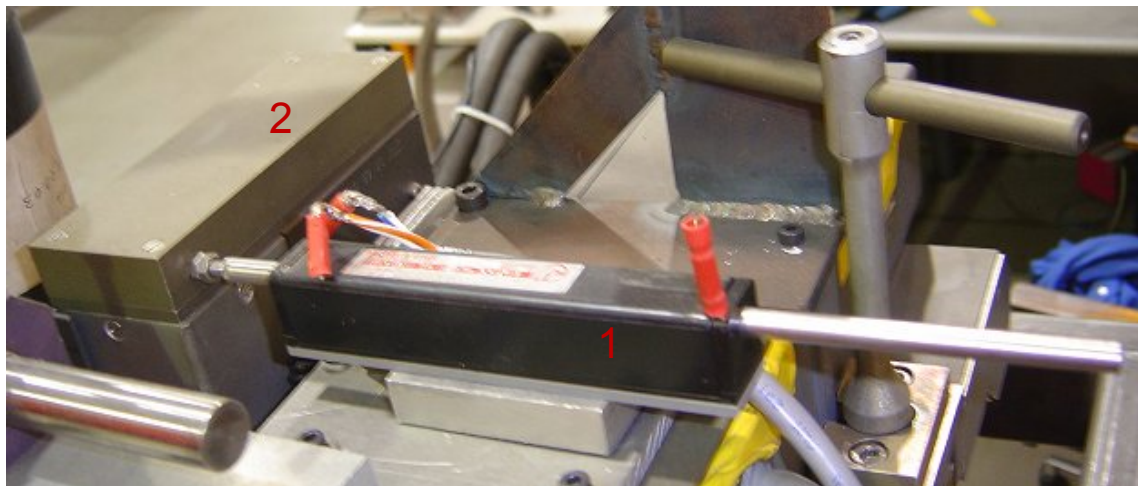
Linear resistor attached to the welding head.
